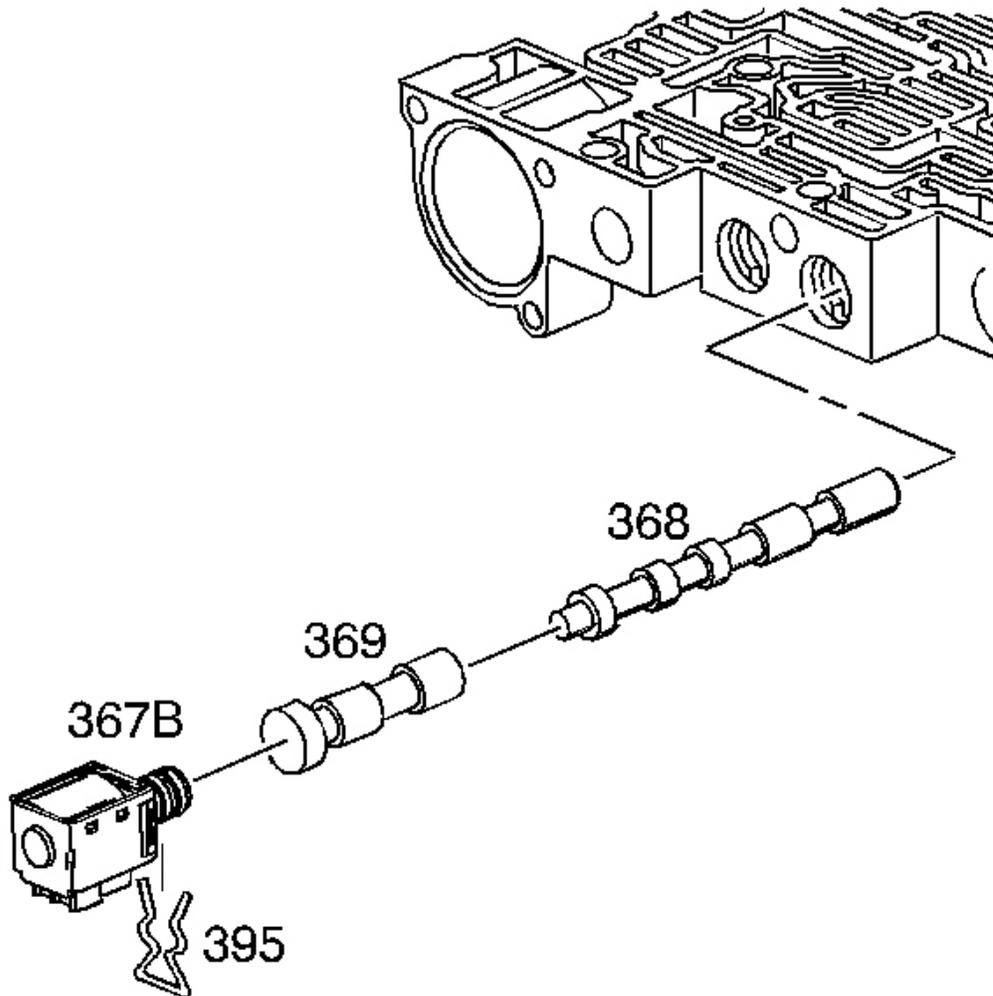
Solenoid Retainer, 2-3 Shift Solenoid, 2-3 Shuttle Valve & 2-3 Shift Valve
